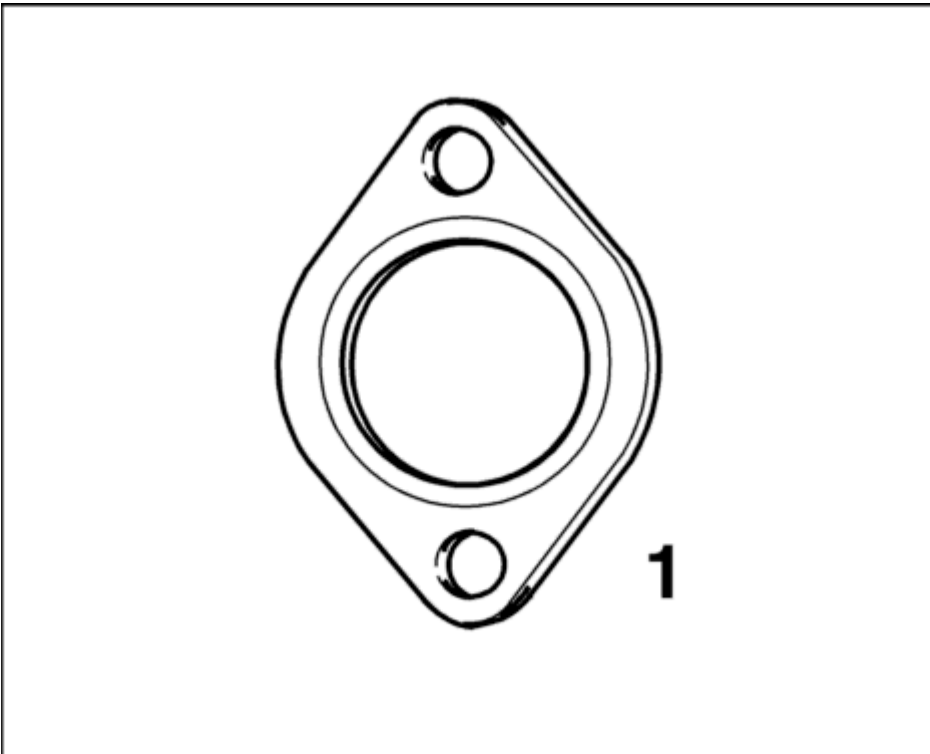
Installation position of retainer plate for solenoid hydraulic valve for camshaft timing
